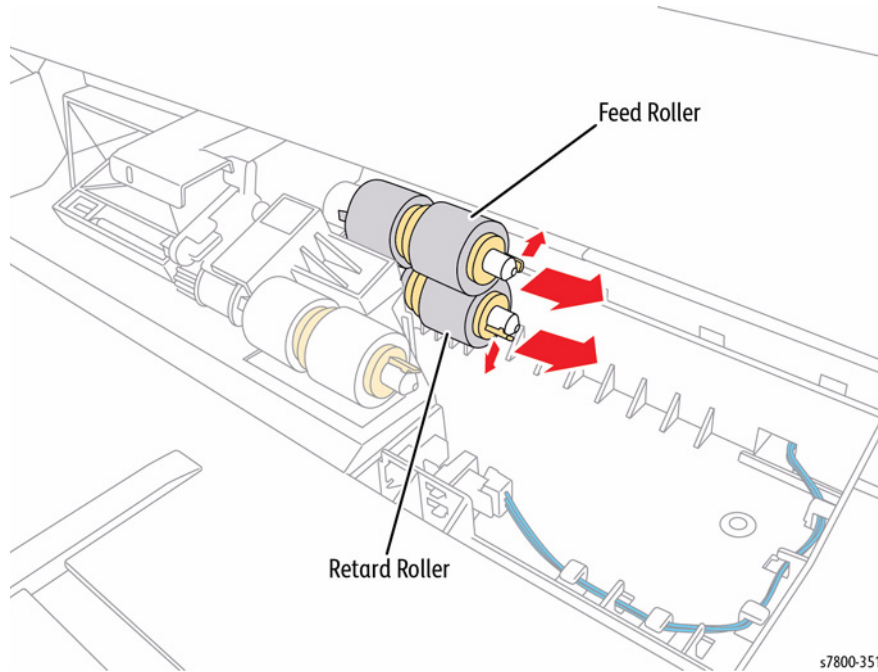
Removing the Tray 1 Feed/ Retard Roll
